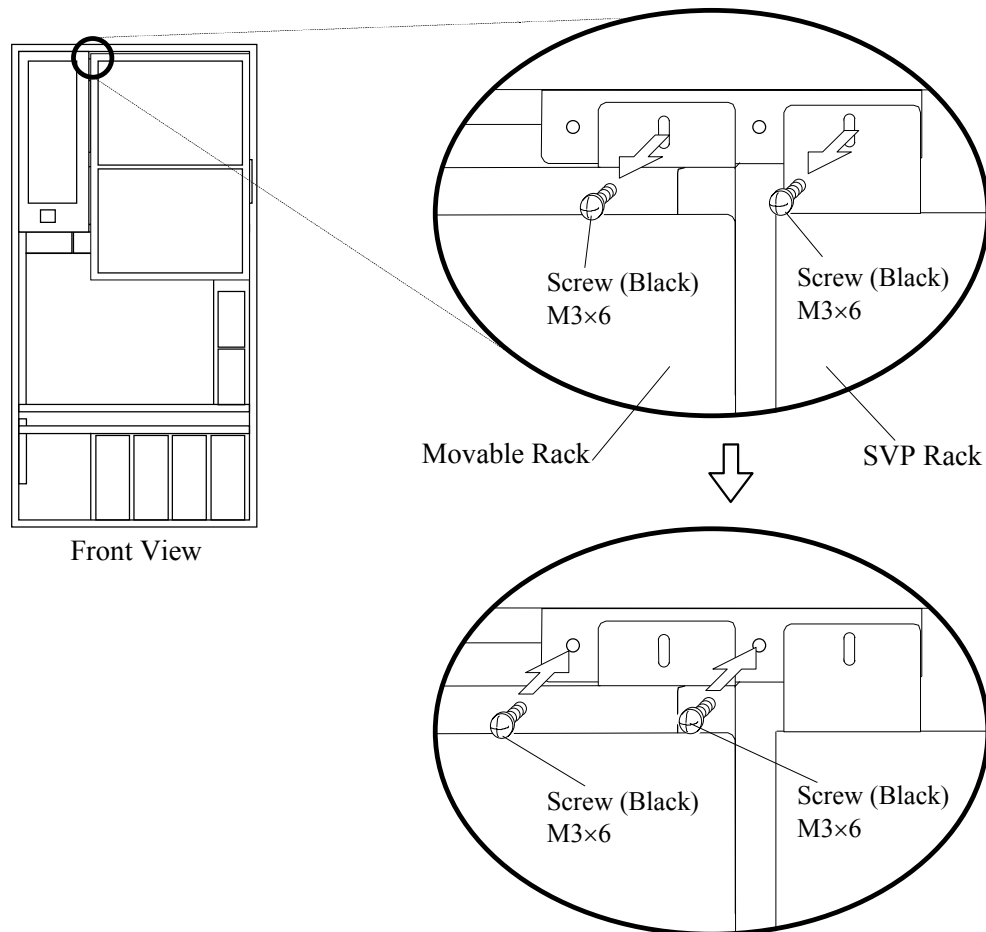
Removal of Screw for Transporting the Movable Rack
